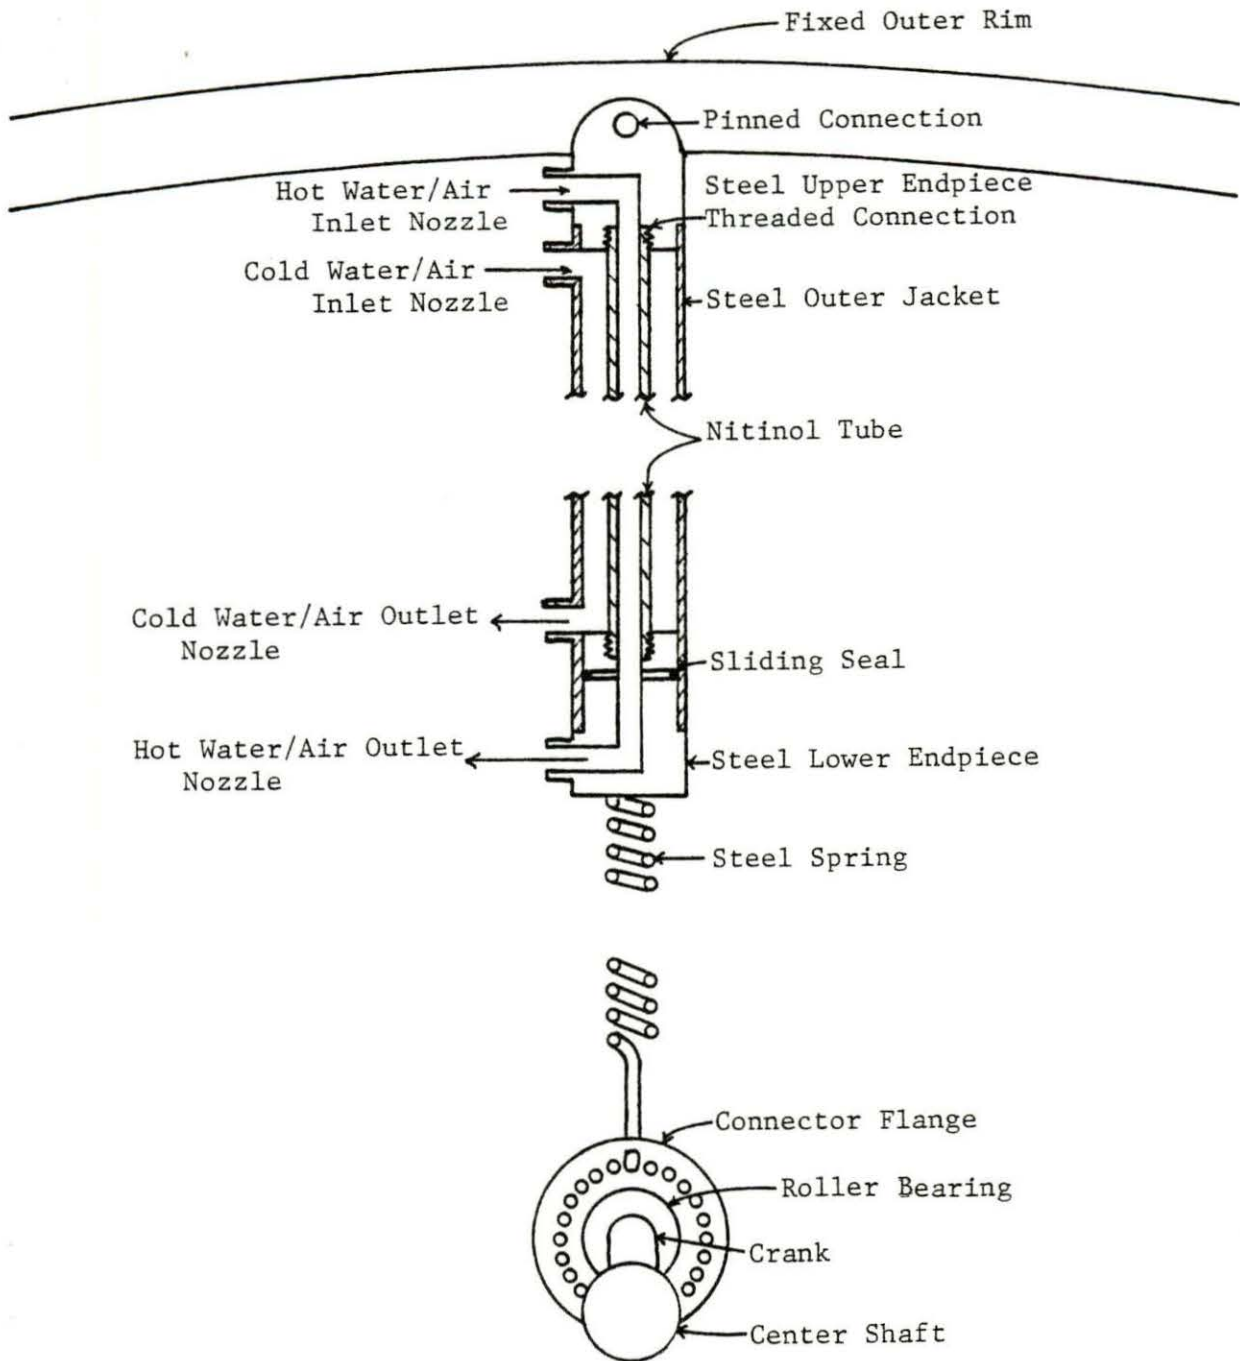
Cutaway view of one spoke in proposed Nitinol heat engine
